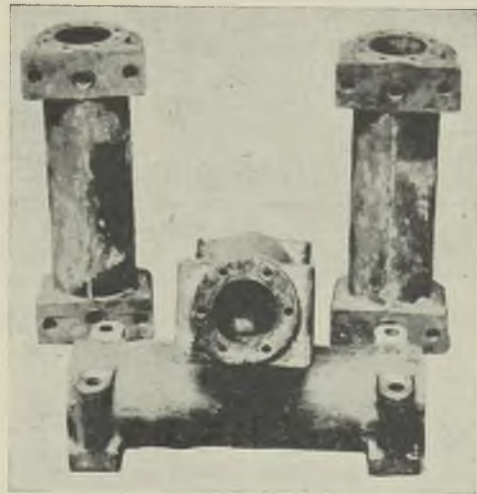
NI-TENSYL CYLINDERS FOR HYDRAULIC SAWING MACHINES.
